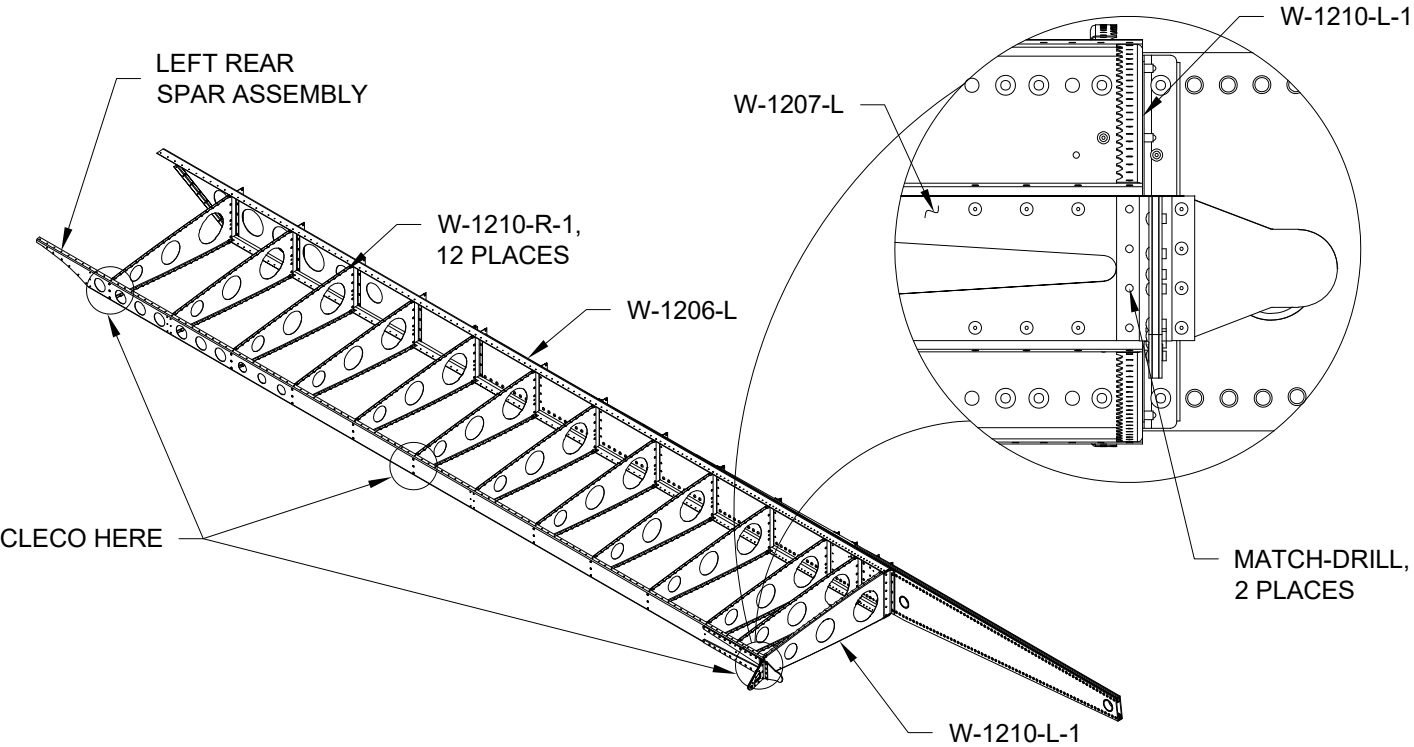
MATCH-DRILLING MAIN RIB AFT FLANGE
